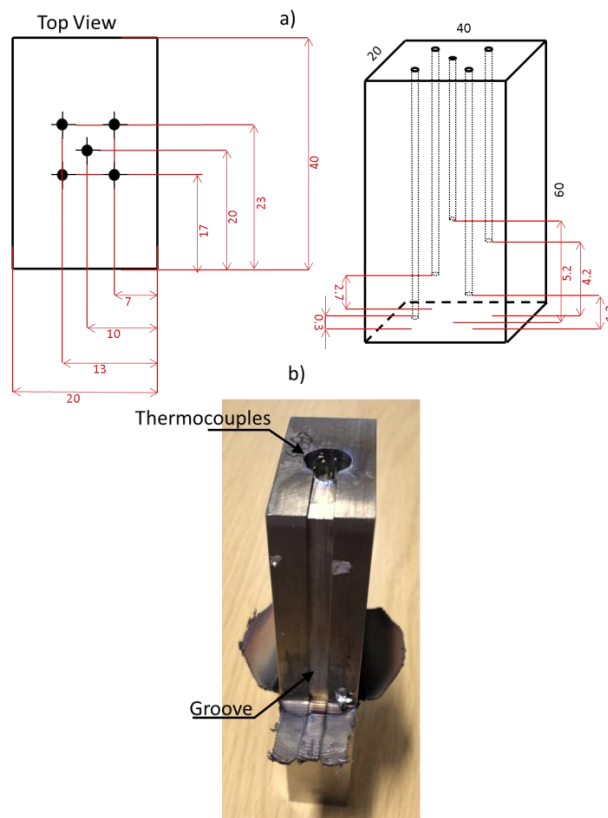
a) Positioning of the thermocouples and b) experimental sample showing the hole where the thermocouples were fitted and the groove
